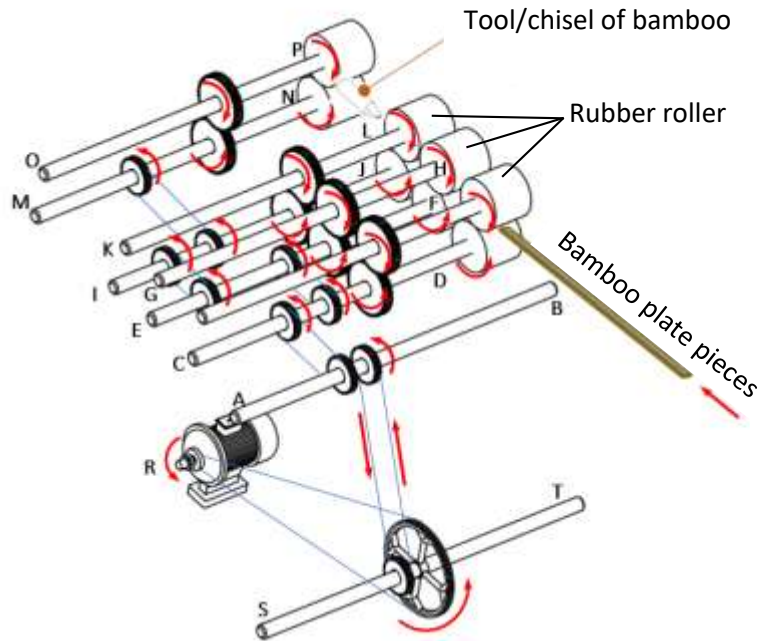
General form of the mechanical system of the bamboo stick production machine
